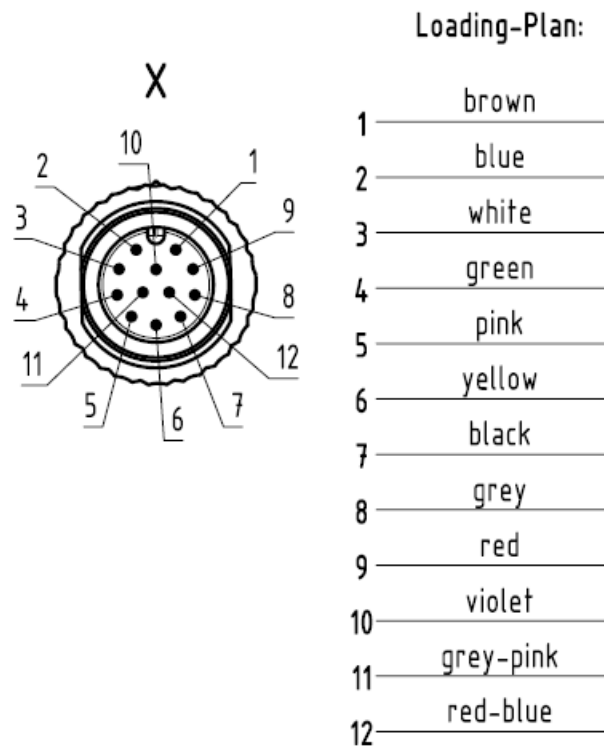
Color Coding of Channels in Harting Breakout Cable (see attachment 1)
